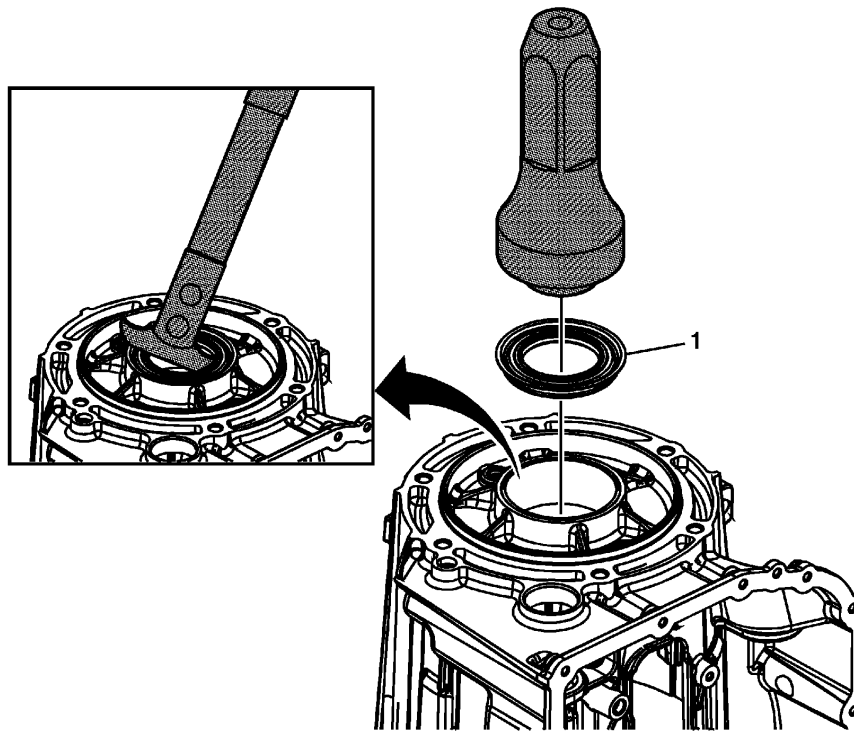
Locating Low And Reverse Band Servo Piston Seal
